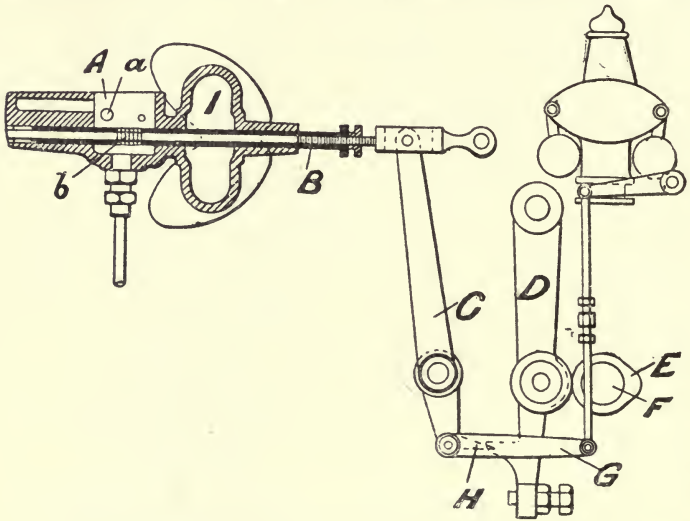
Britannia Oil Engine (oil feed and governing).
